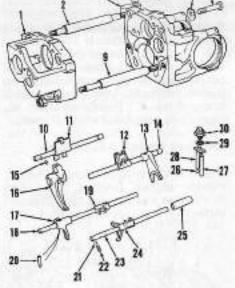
Exploded view showing end plates, shift rods and shift forks used on 1190, 1290 and 1390 models. Models 1490 and 1690 are similar.
